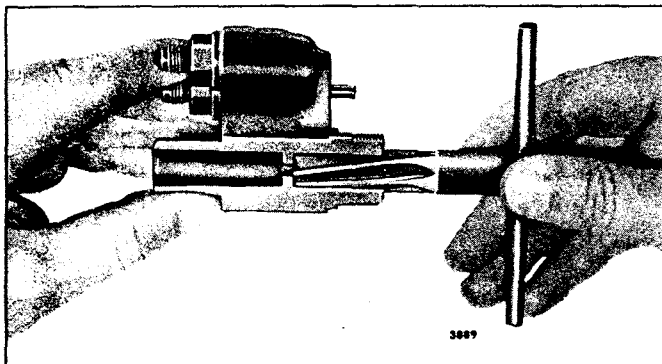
Cleaning Injector Body Ring with Tool J 21089
